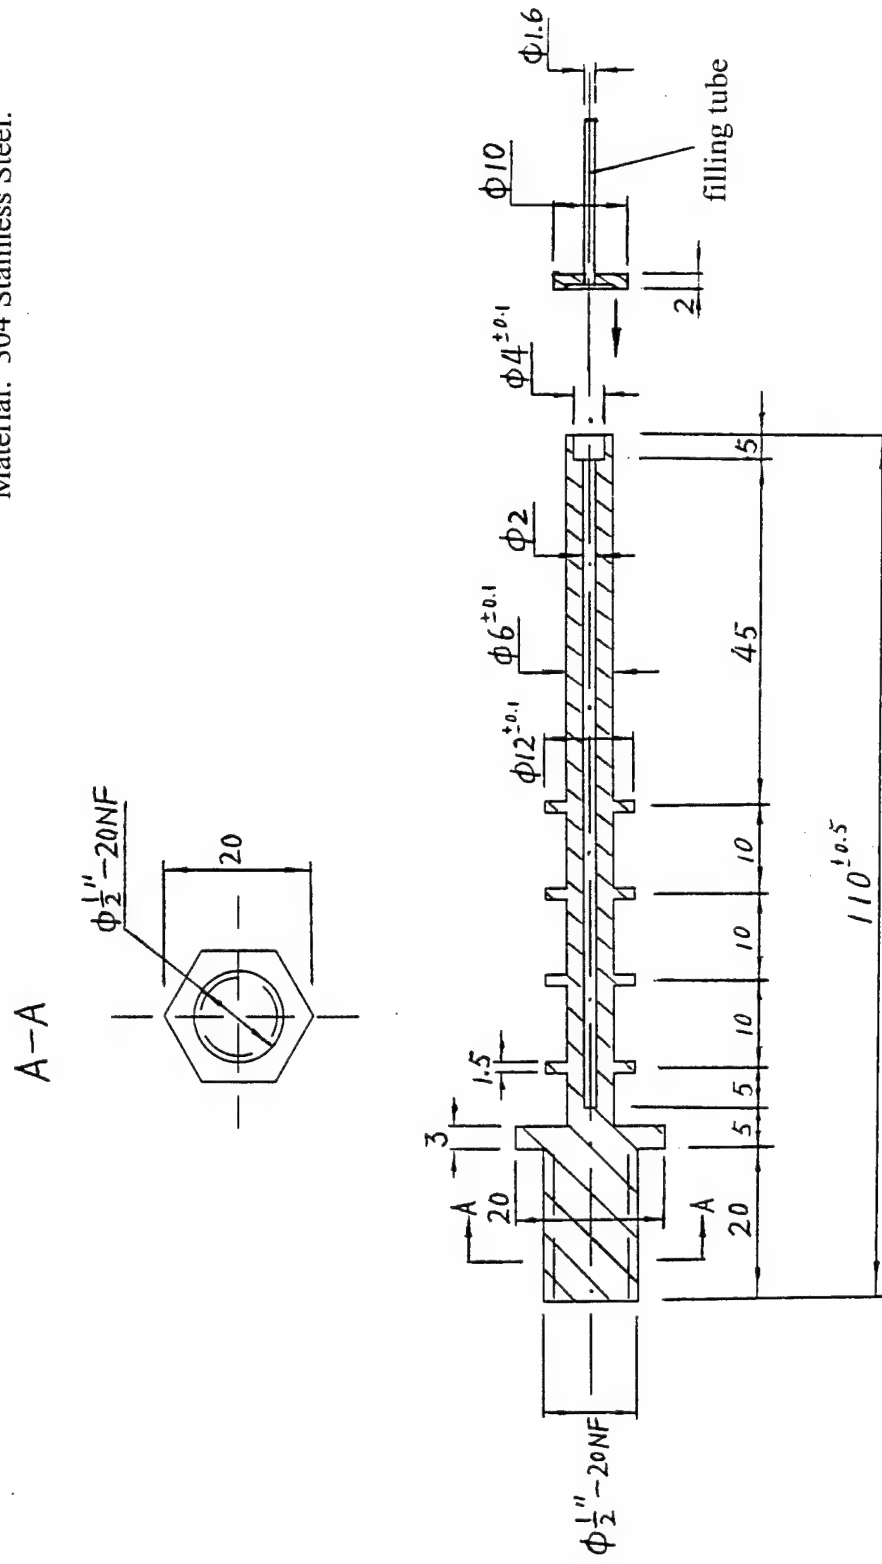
Schematic of radially rotating miniature heat pipe with a inner diameter of 2 mm.
